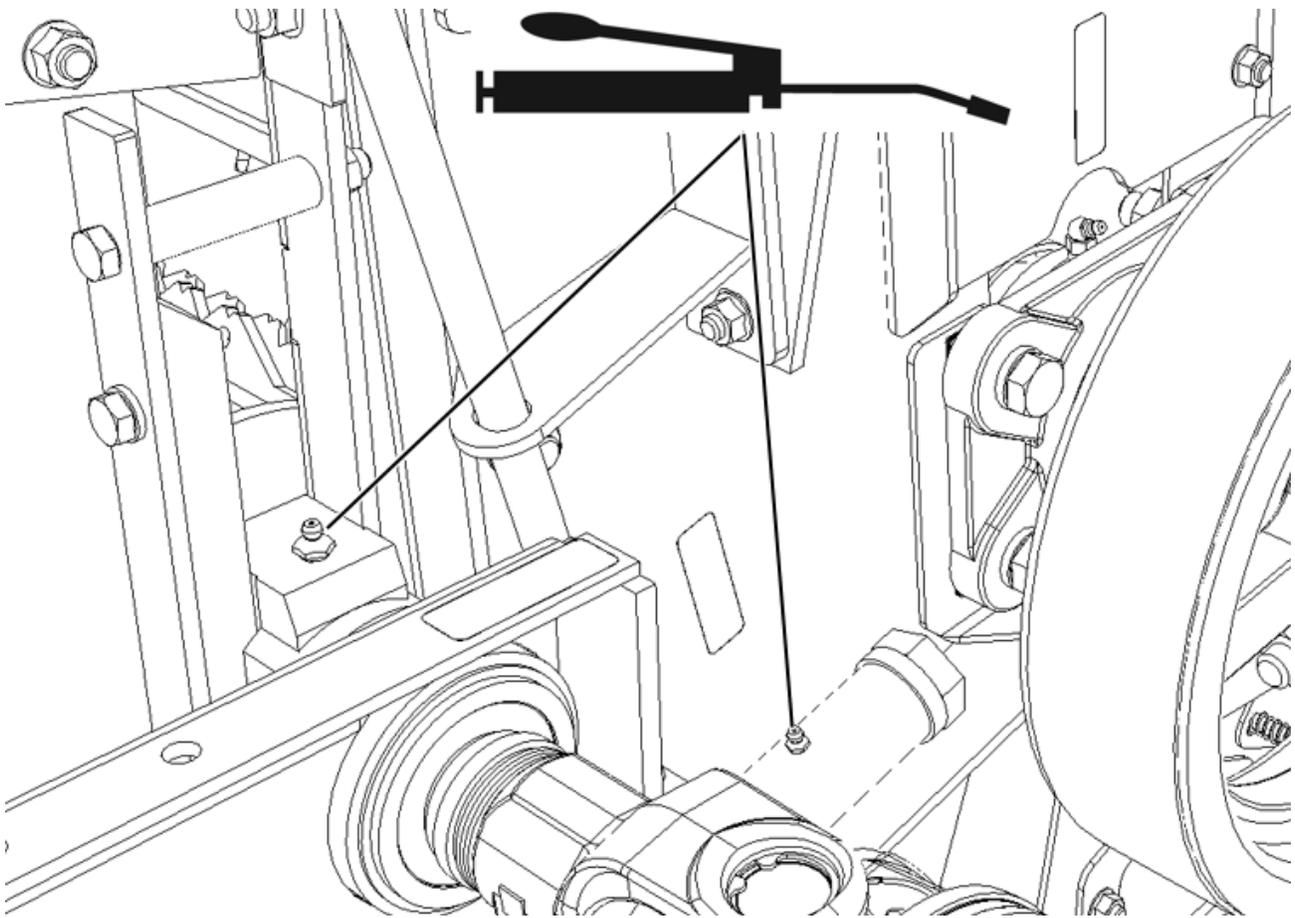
Feed roll slider, shear bar spring plunger (each side – 4 points)
